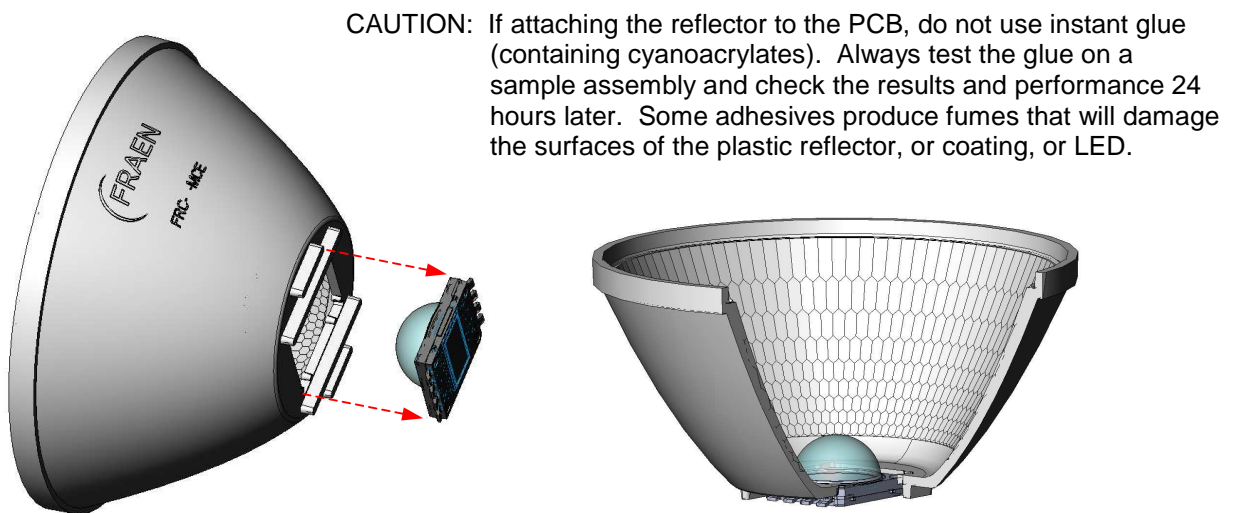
The reflector touches the PCB, and is self-centered on the LED, by 8 small crush-ribs inside the rectangular hole thru the reflector.
